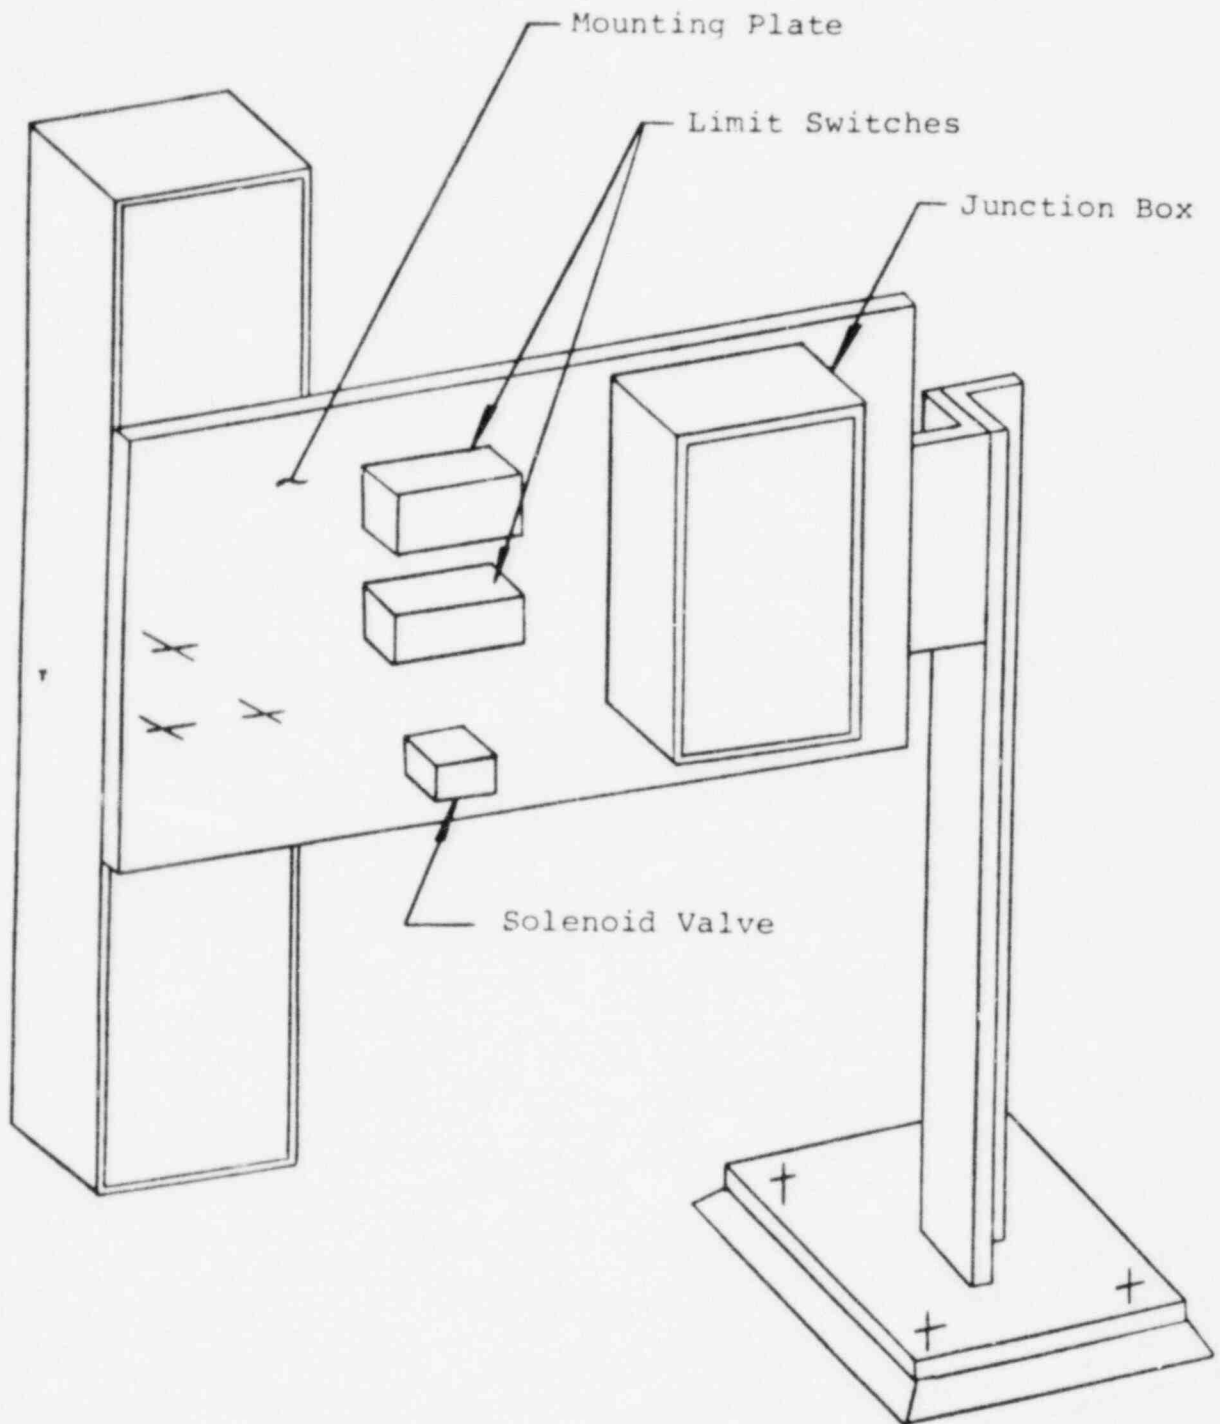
General Configuration, Solenoid Valve Mounting Plate
